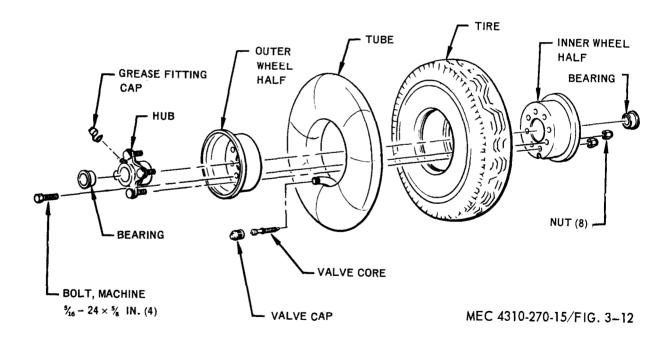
Wheel, tire and tube disassembly and reassembly.
